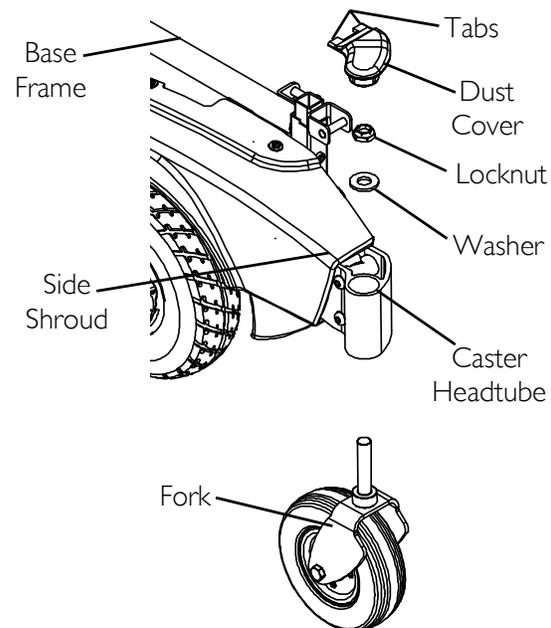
Replacing Front/Rear Caster Assemblies
